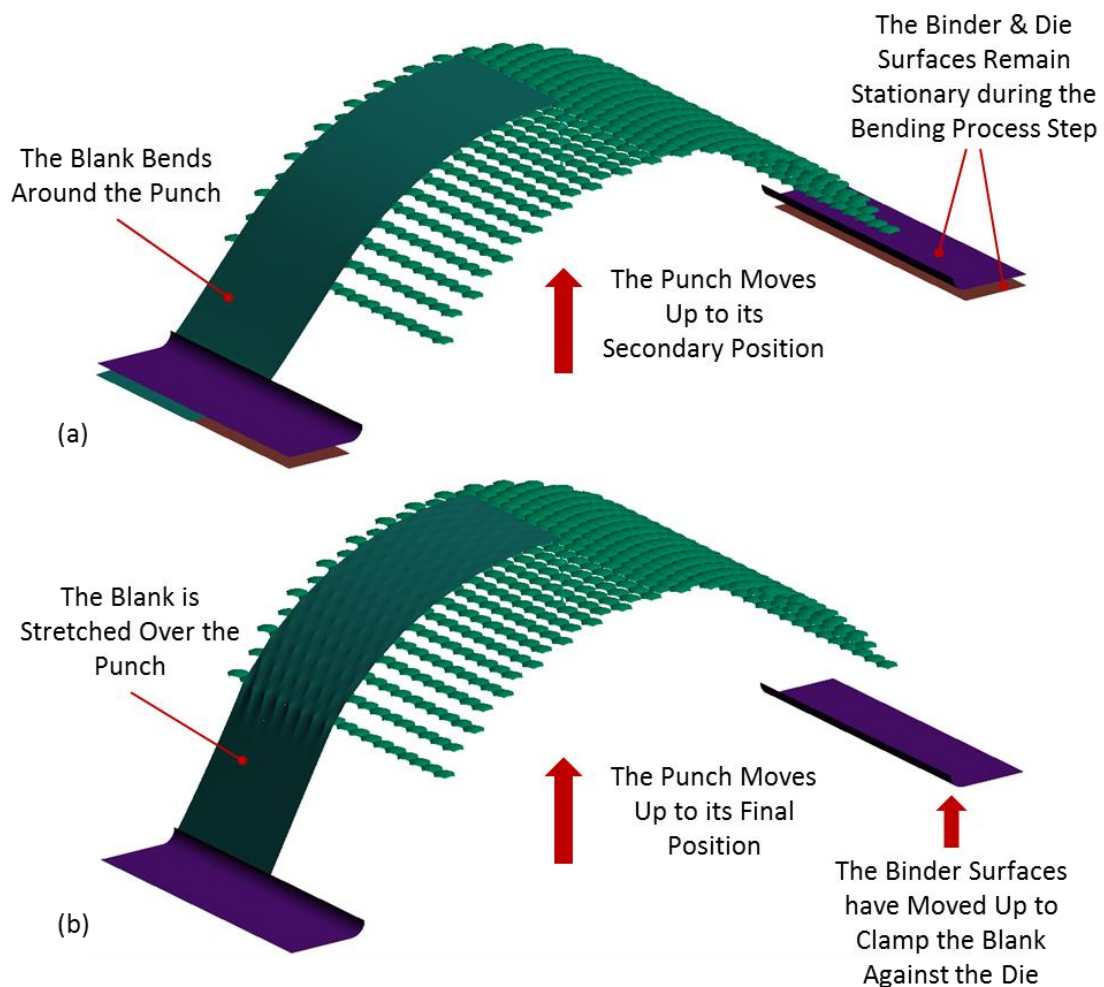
The tooling positions at the end of the bending (a) and drawing (b) process steps
